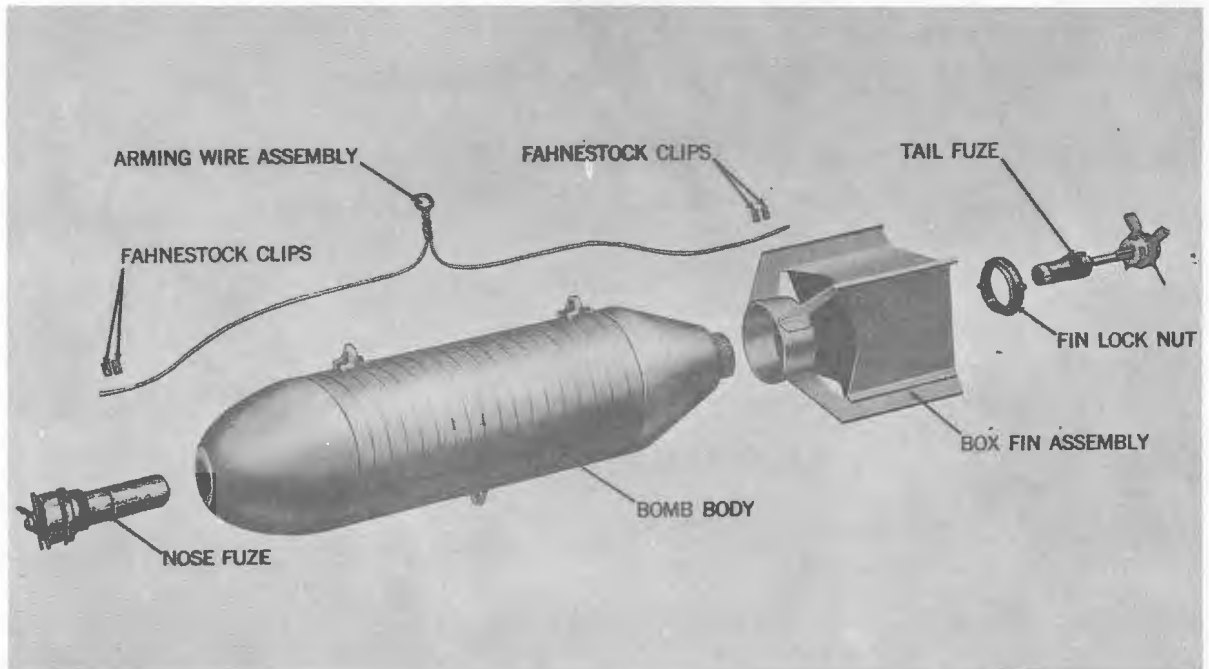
260-lb Frag Bomb AN-M81 with Fin Assembly AN-M103A1, Exploded View.
